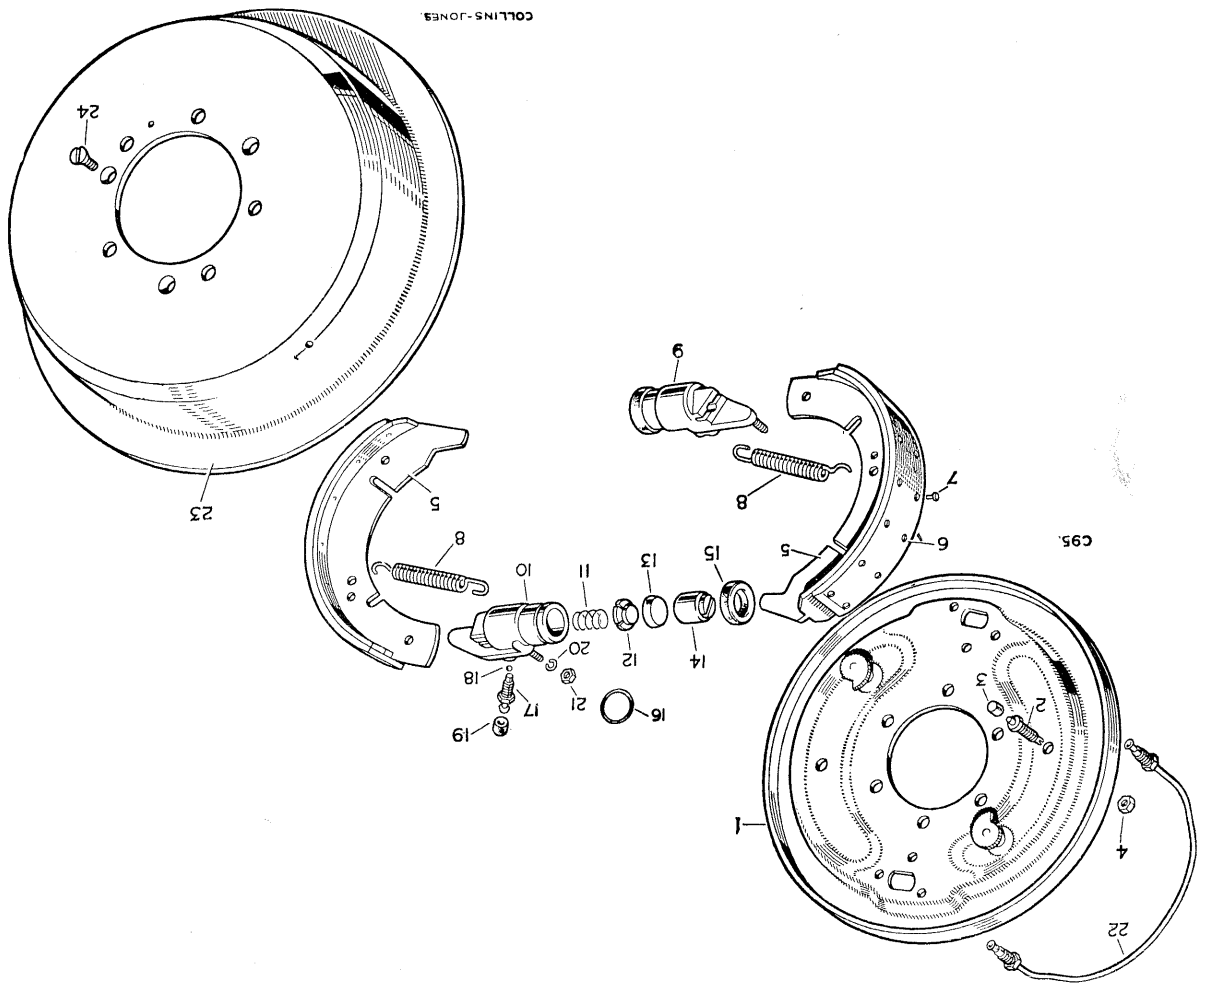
Layout of front wheel brake unit, 11" brakes—109 models
